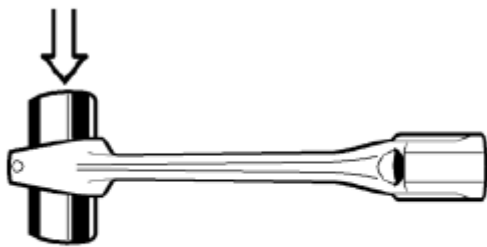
Removing Piston Pin Circlip With Special Tool (11 4 492)
